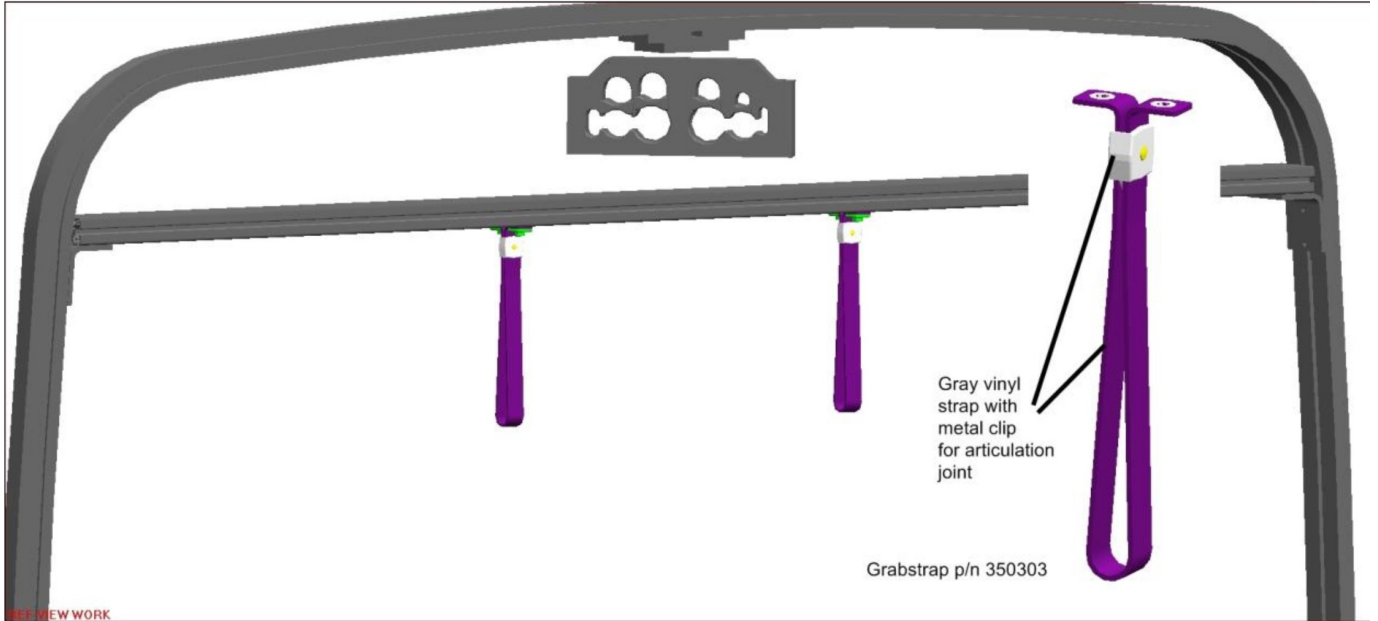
SHOWN VIEW OF THE NEW STRAP-ASSIST (NF PN: 350303) INSTALLED ON THE CENTER HOOP AT THE ATG JOINT. SECTION A VIEW WILL SHOW INSTALLATION VIEW OF THE HARDWARE.
